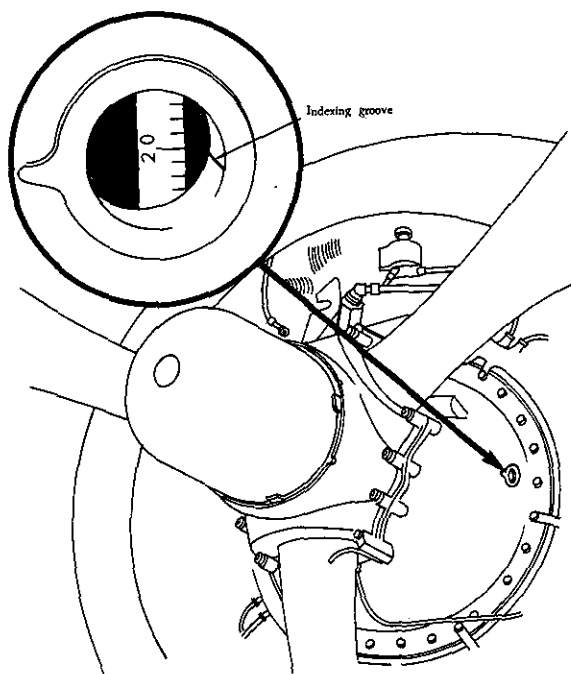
Typical built-in timing mark on propeller reduction gear.
